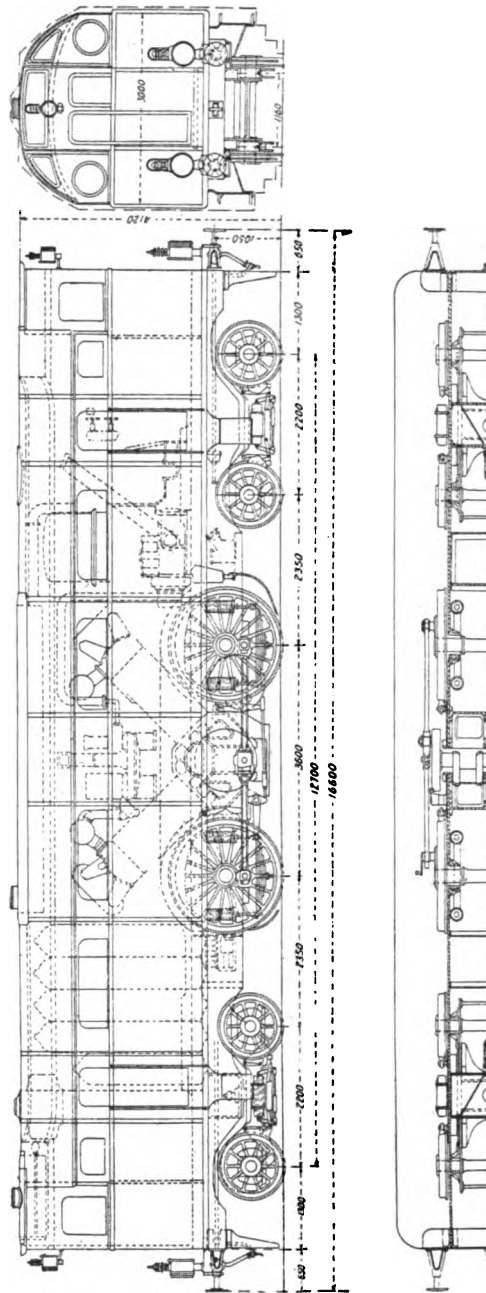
SECTIONAL VIEWS OF DIESEL LOCOMOTIVE
